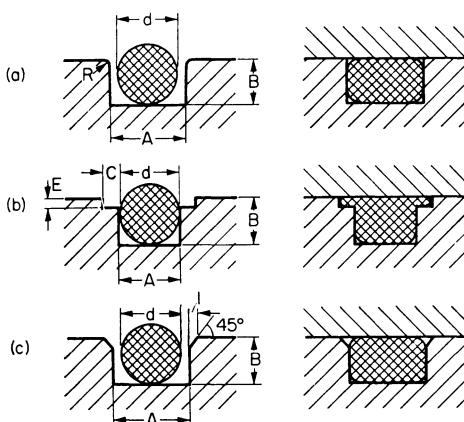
Grooves with rectangular cross section, for O-ring seals (limited compression):
